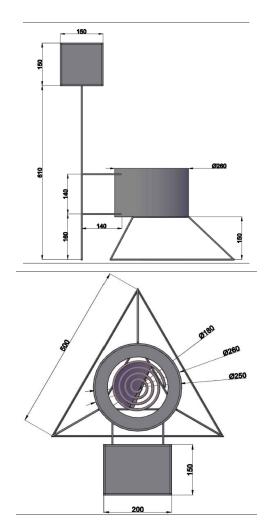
Elevation and Plan views of the Chemical Reactor frame
